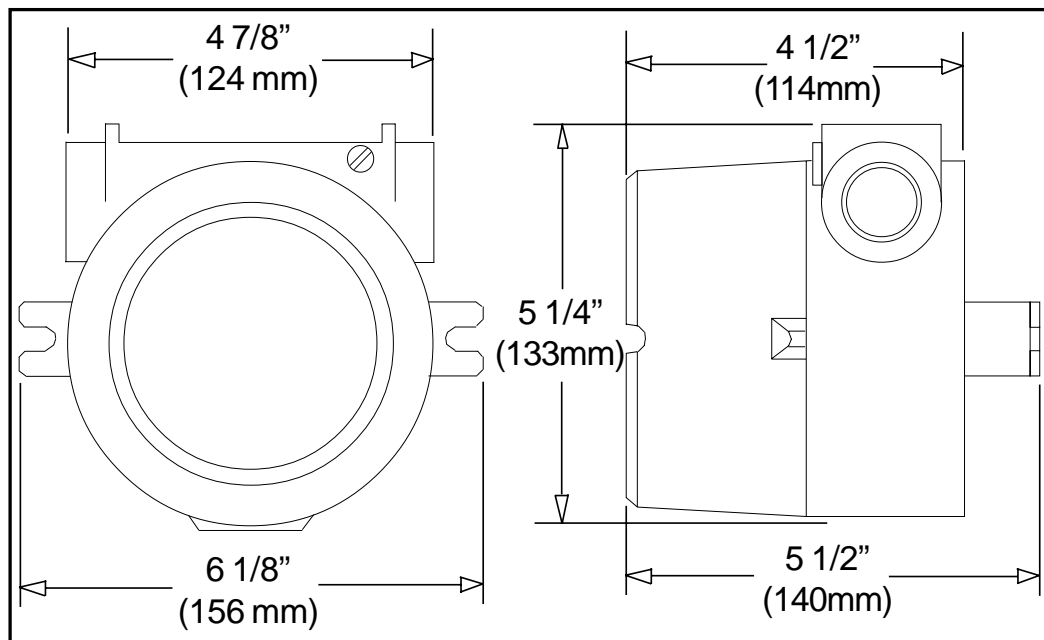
Overall Dimensions of the Digi-Relay Enclosure
